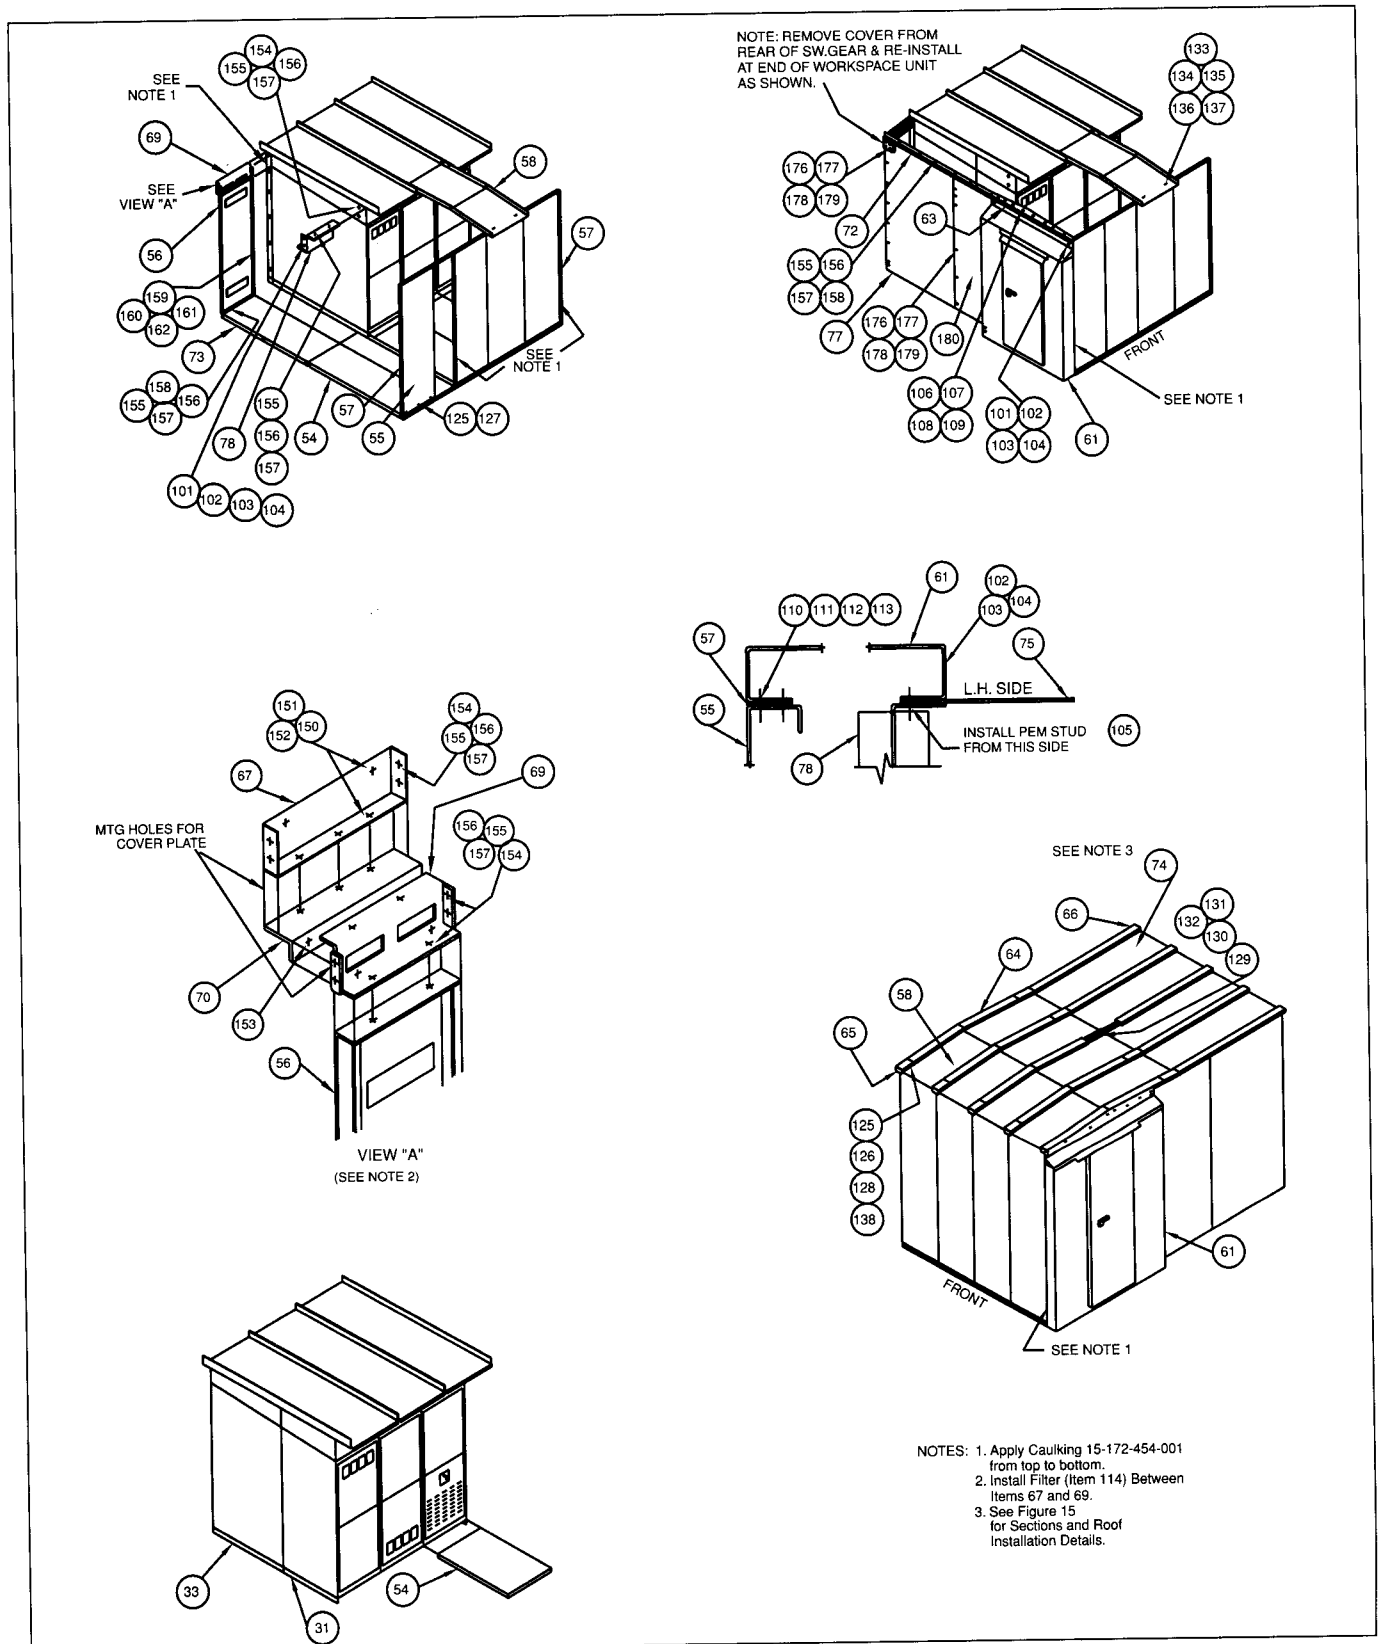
Single Aisle (SGM) with Work Space Field Assembly
